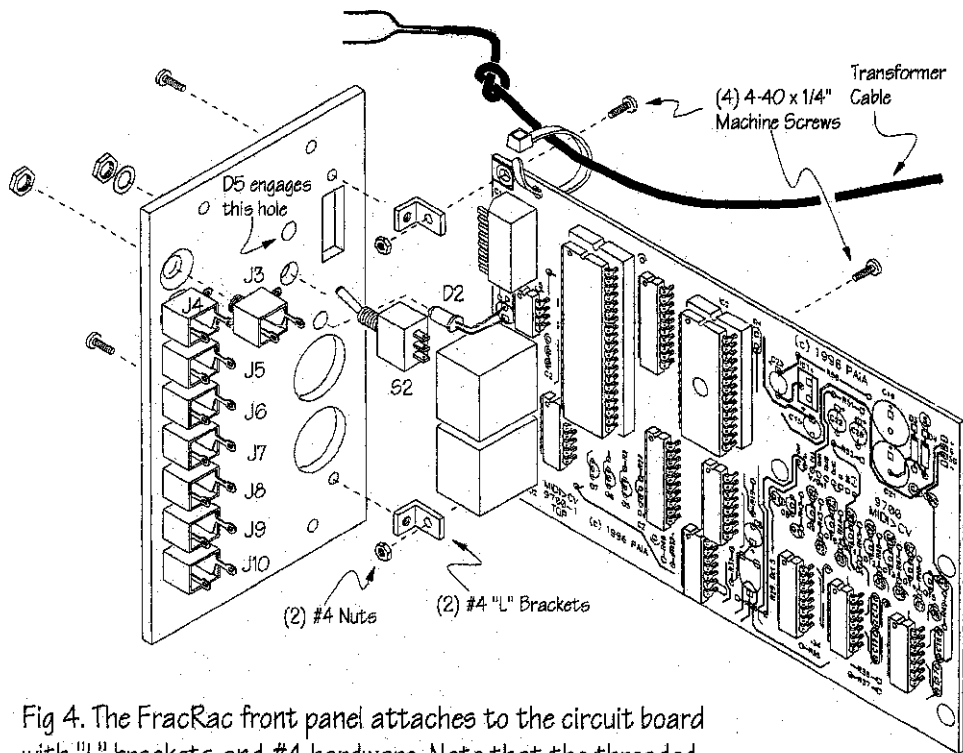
The FracRac front panel attaches to the circuit board with "L" brackets and #4 hardware. Note that the threaded holes are used to attach the brackets to the panel.
